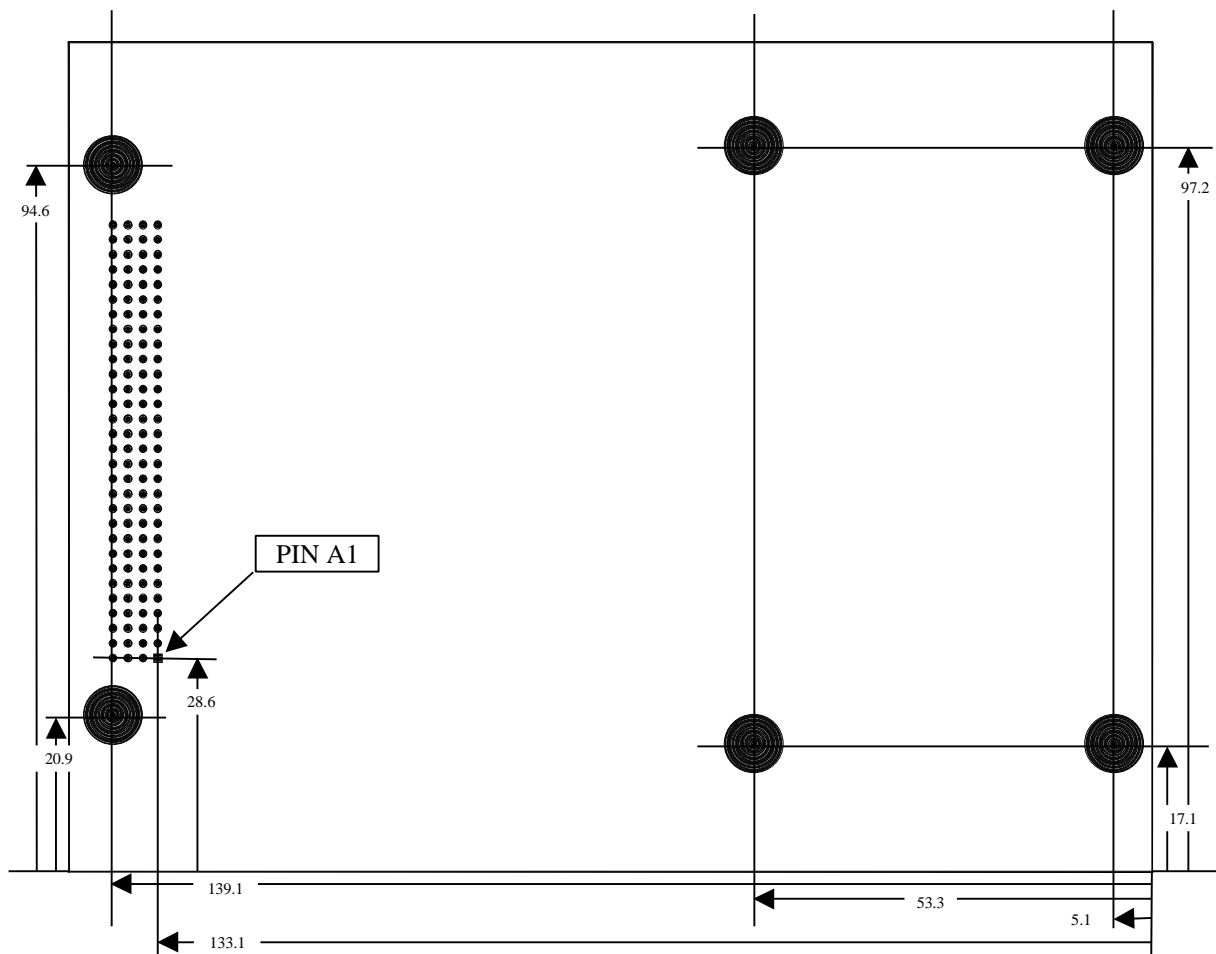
MAGNUM PCB - Top View Showing Mounting Hole Positions.
